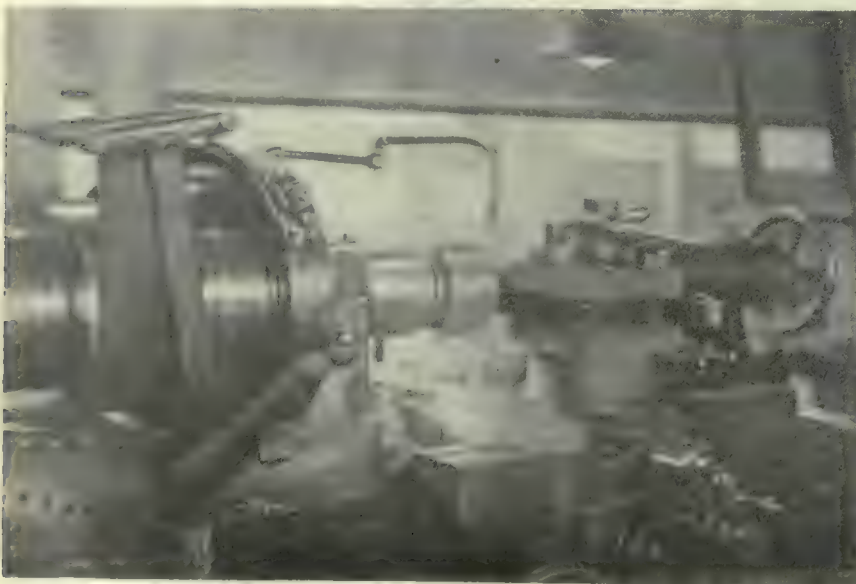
MACHINING ADAPTERS ON C.M.C. LATHE.
